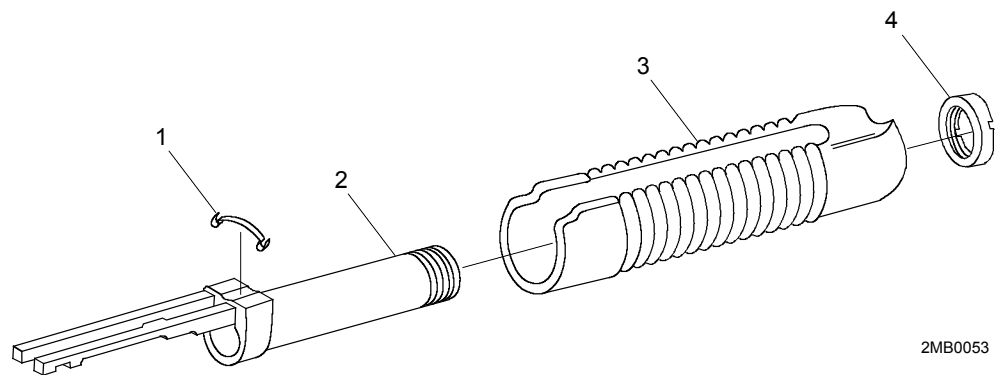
Fore End Slide Assembly, P/N MOSS-05
